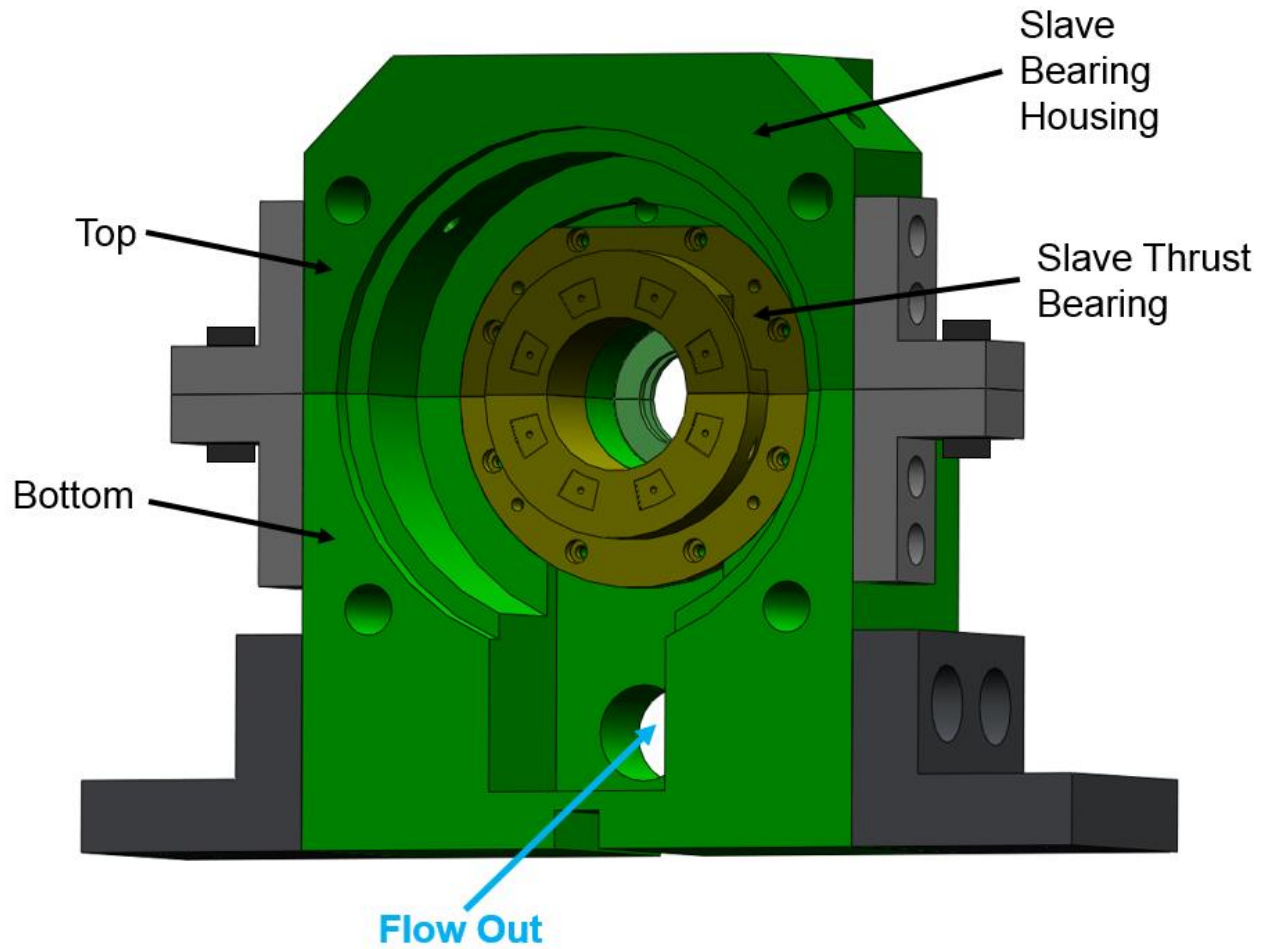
Bearing housing with the slave thrust bearing installed [9].
